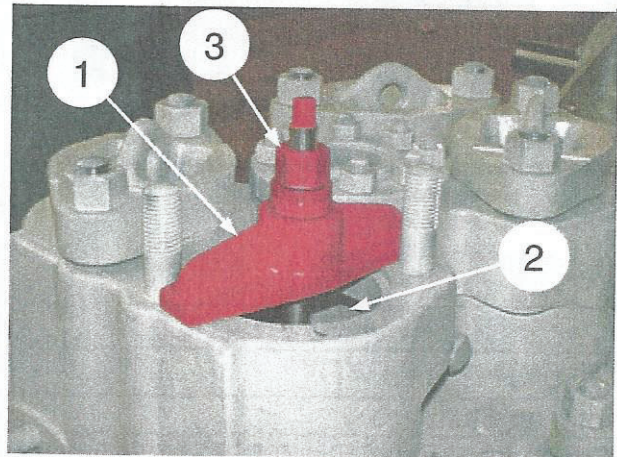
Mud Pump Valve Seat Removal; Because of the self locking taper used on this seat, a puller [1] must be used for proper removal. Insert the puller shoulders behind the valve seat [2]. Slowly tighten the nut [3] until the valve seat [2] is disengaged. The valve seat may then be lifted out. NOTE: When installing the valve seat, a wooden block should be used and care should be exercised in hammering the seat tightly in place.
